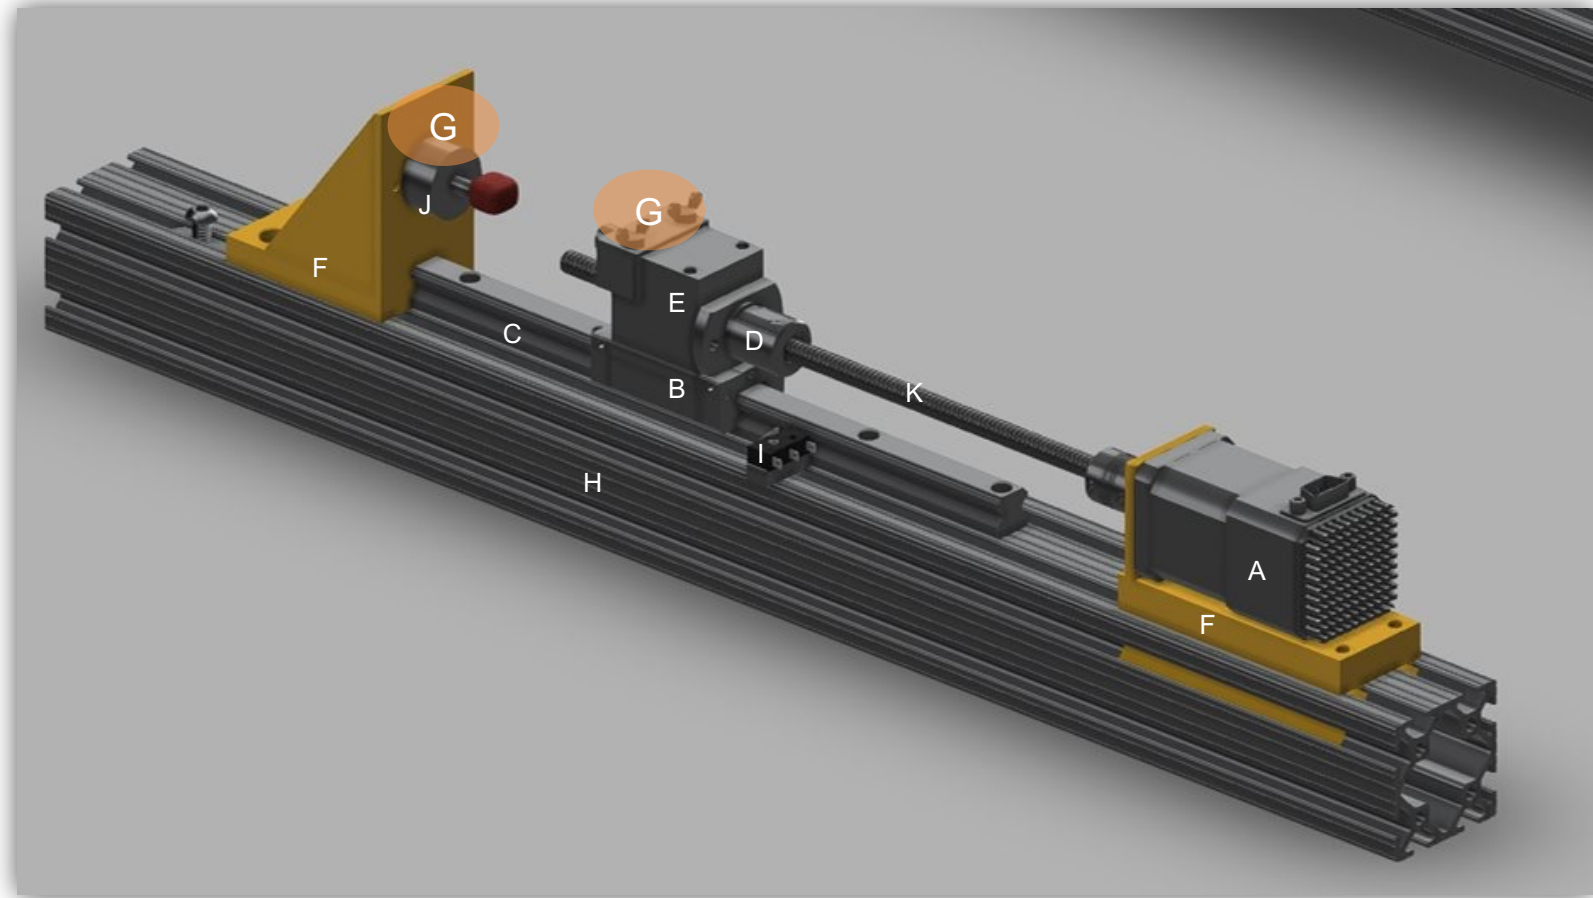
Version 1 concept of the uniaxial tensile testing machine designed in *Fusion 360
